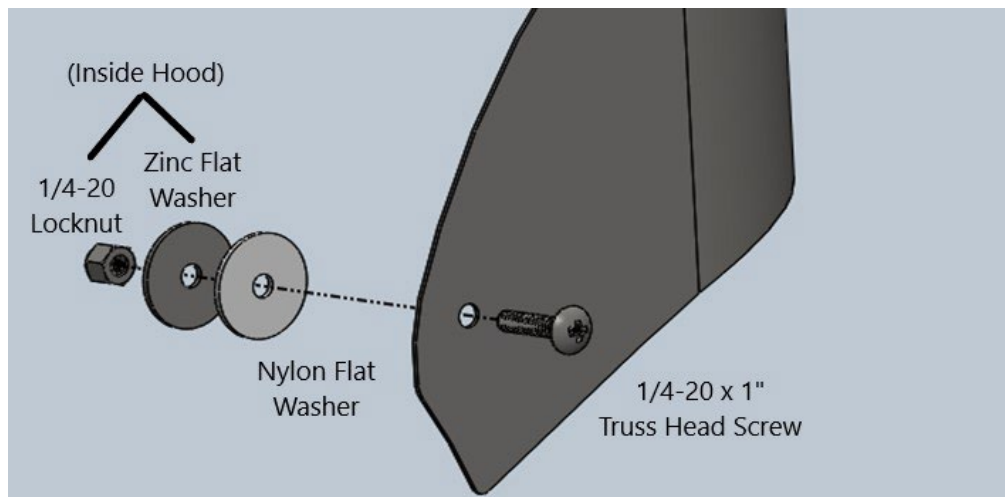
Installation of Rubber Edge Trim (Driver Side Shown)
